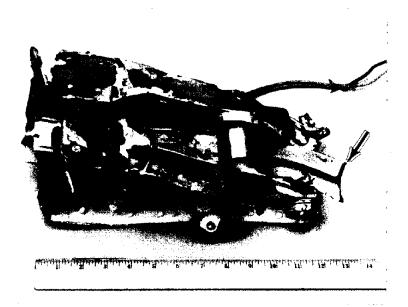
Overall view of the No. 1 slat pieces. The unlabeled arrows indicate mating locations in the slider arm.
